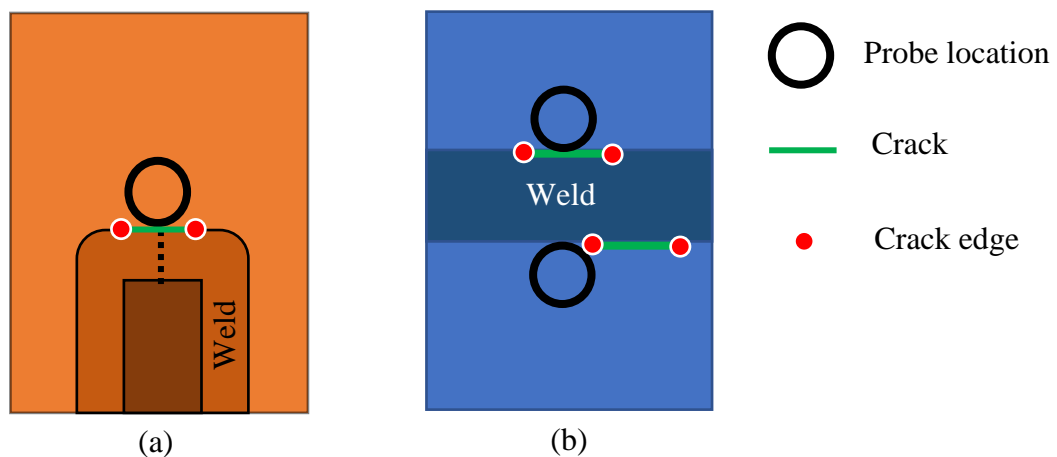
Crack formation and location of eddy current probe in (a) Gusset joint, and (b) Butt-welded joint.
